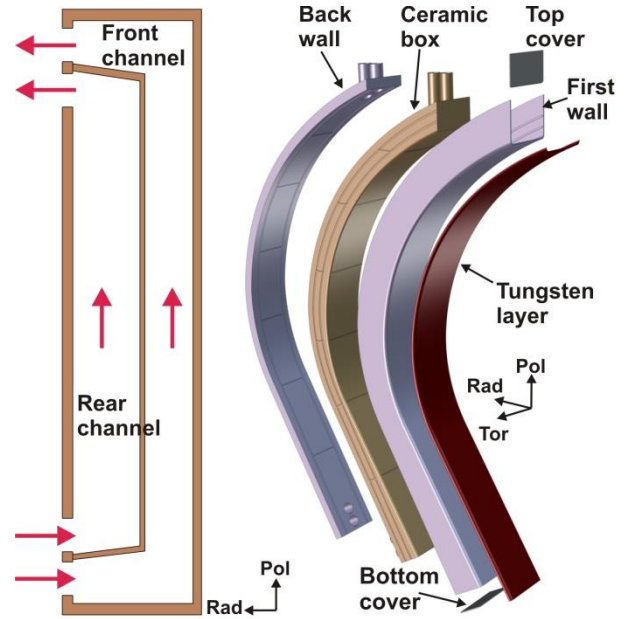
PbLi circulation scheme (left). Exploded view of the OBC segment components (right) (He pipes not shown).
